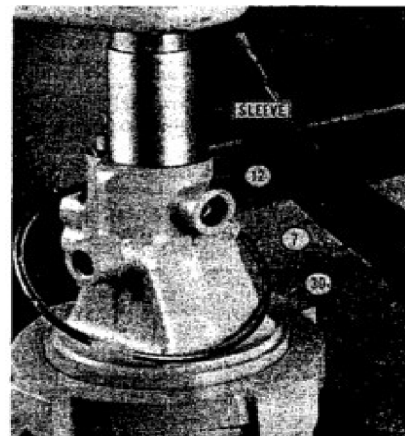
Using sleeve and arbor press to push housing into cover to allow installation of the cover retaining snap ring (7).
